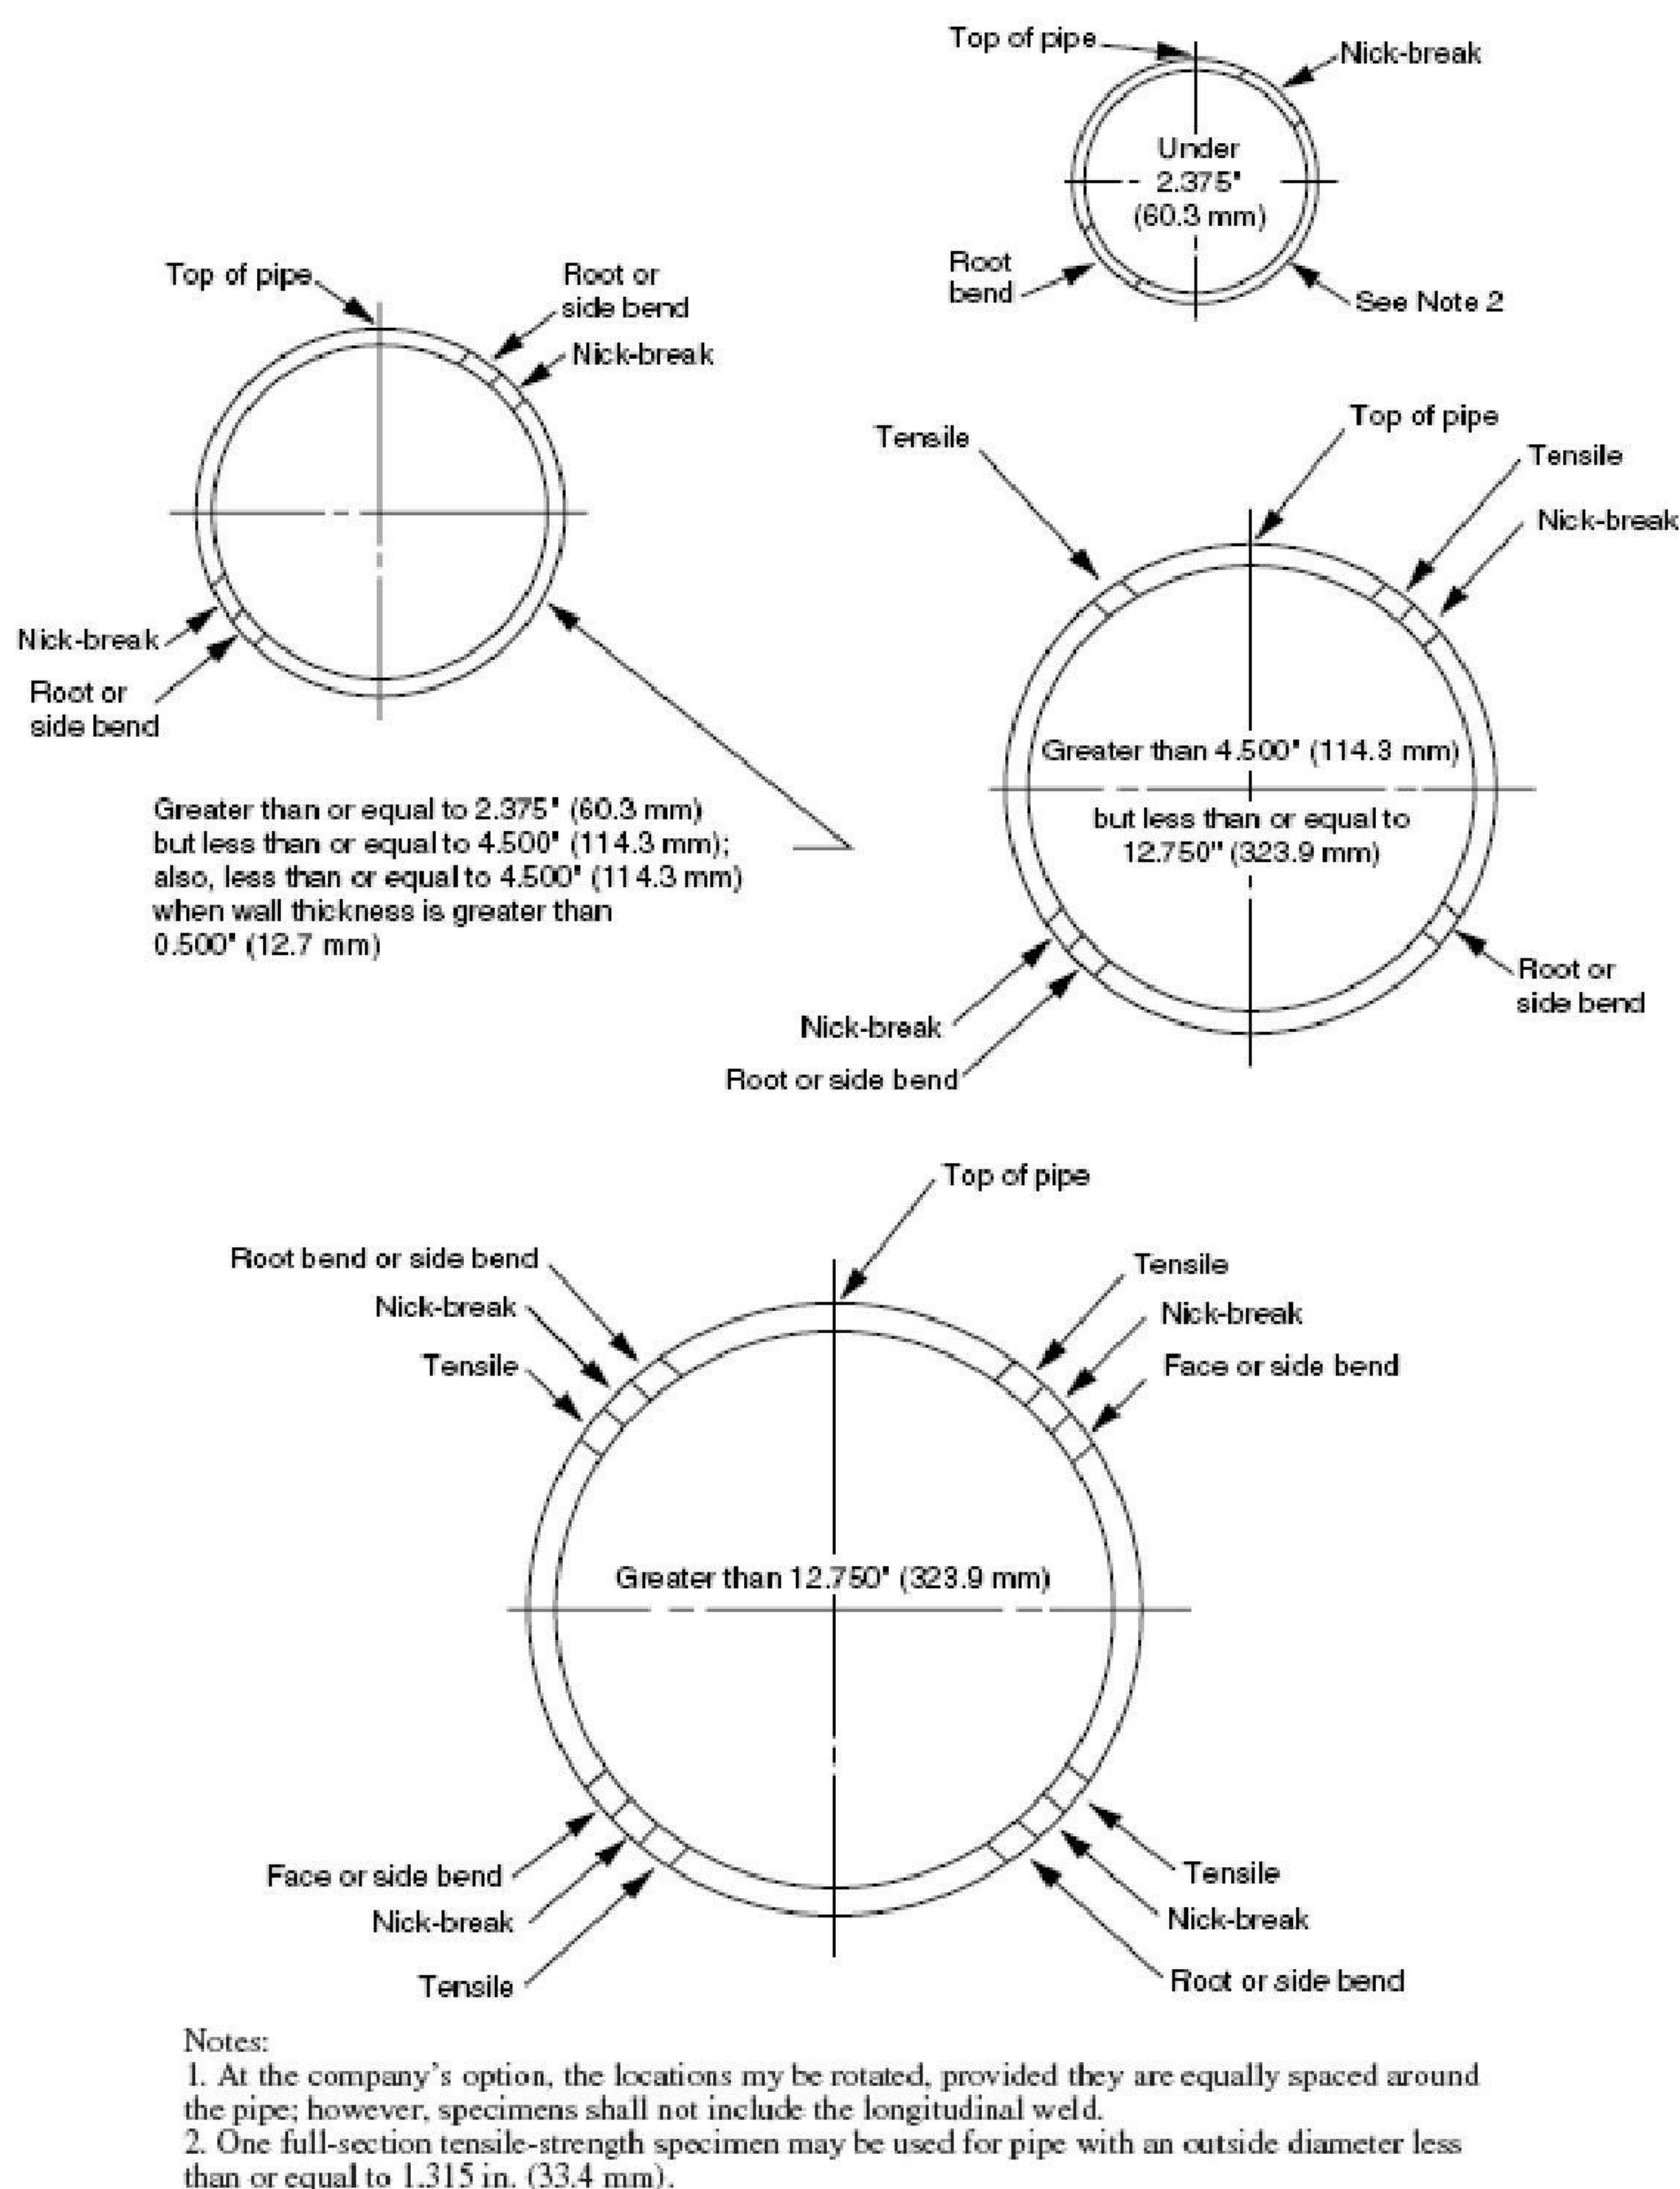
Location of Test Butt-weld Specimens for Welder Qualification Test
